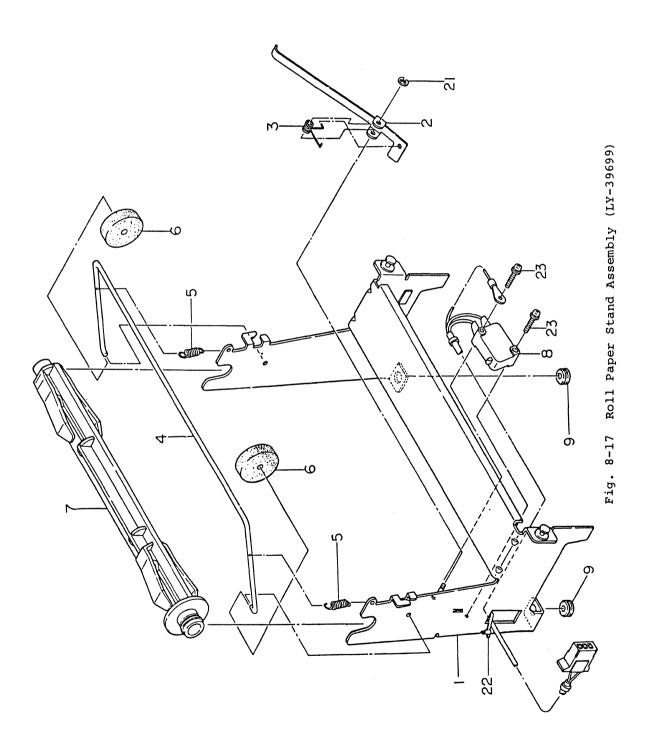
Roll Paper Stand Assembly (LY-39699)
